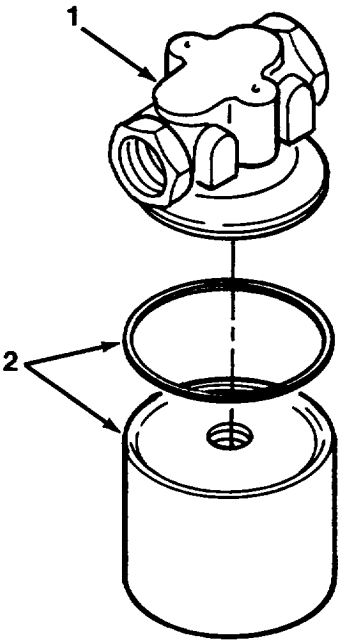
HYDRAULIC FILTER ASSEMBLY
